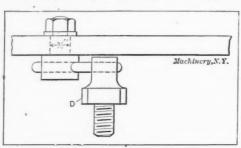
Detail of Clamping Device for Fixture shown in Fig. 5
